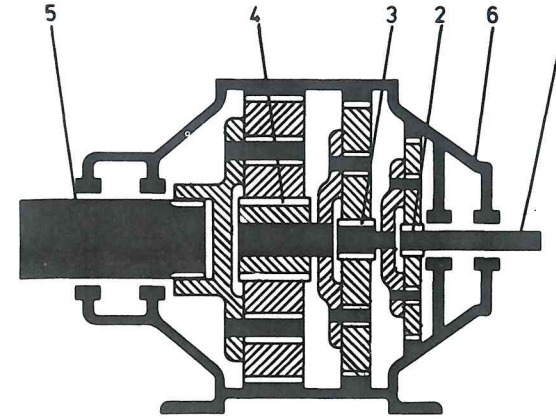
Multistage planetary gearbox. High-speed shaft, 1; first planetary stage, 2; second stage, 3; third stage, 4; low-speed shaft, 5; gear housing, 6.
